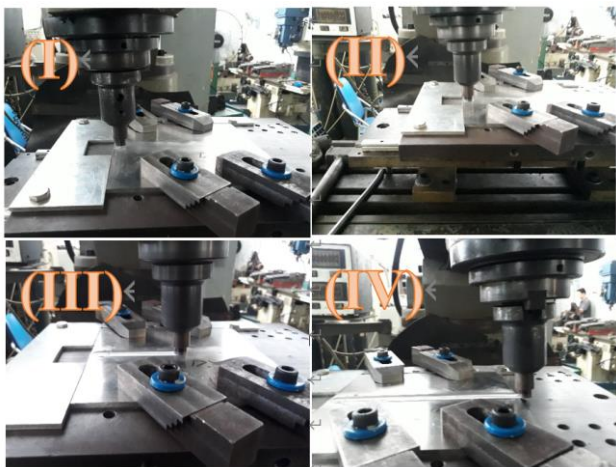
Stages of the welding process: (I) Plunging stage, (II) Dwell stage, (III) Welding stage, (IV) Retraction/Cooling stage
